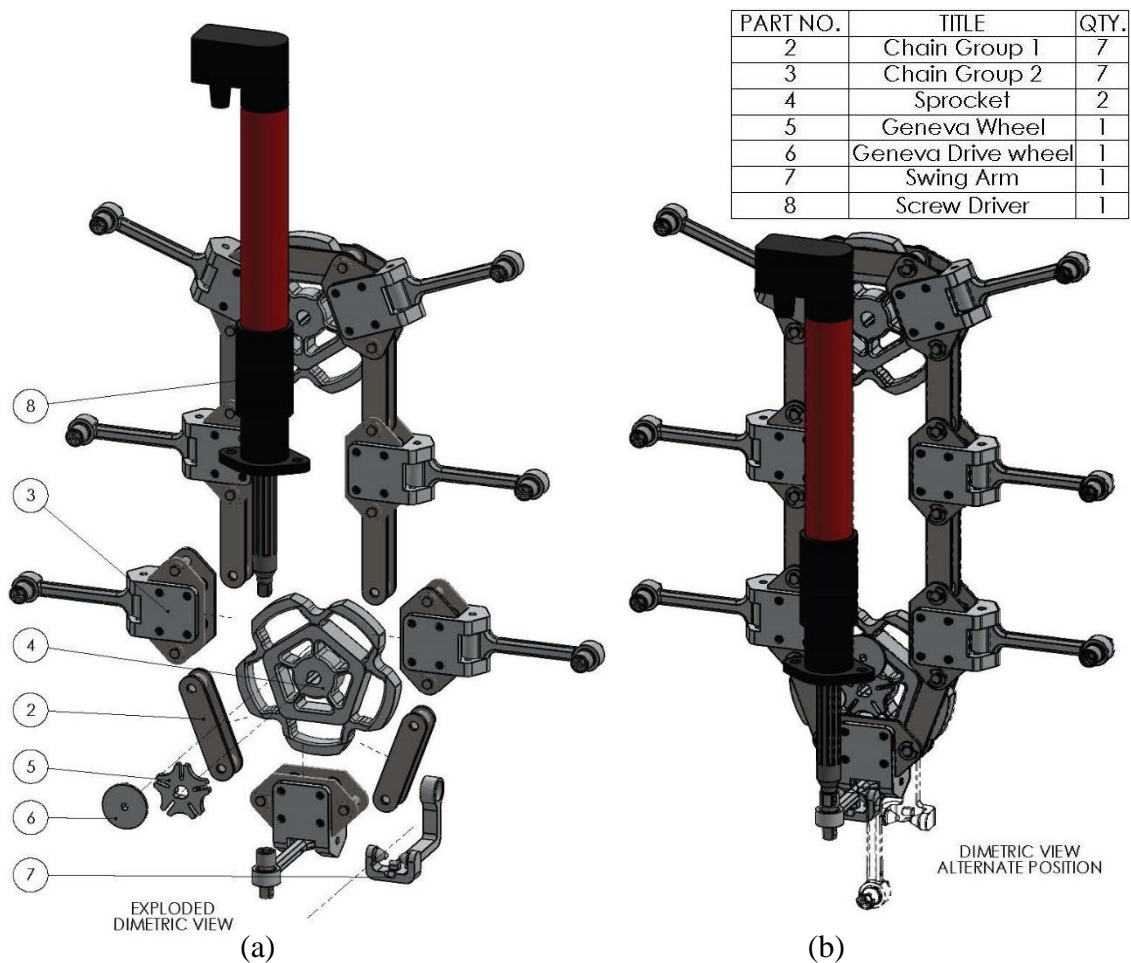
CAD image of assembly: (a) exploded view, (b) dimetric view
